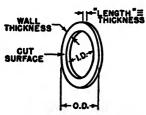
A typical lathe-cut part showing various dimensions. Rubber gaskets, jar rings, and washers are examples of lathe-cut products.
